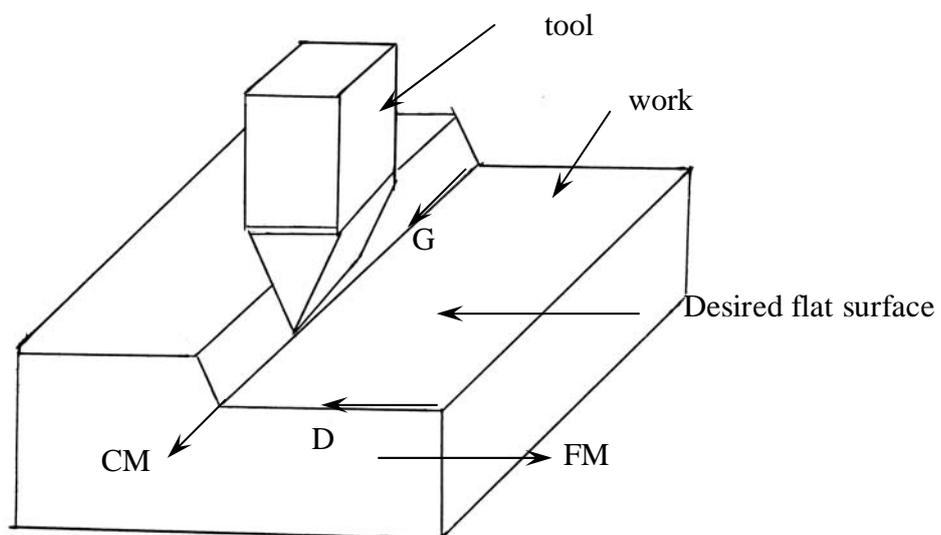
Principle of producing flat surface in shaping machine
